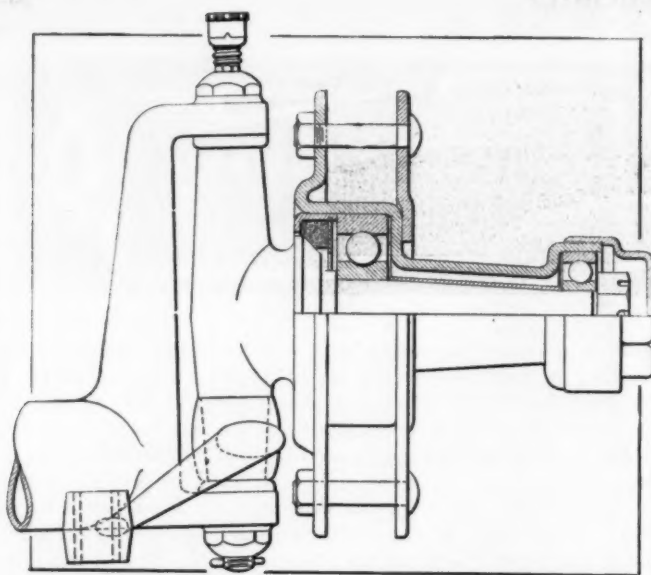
Depicting annular type ball bearings in a hub made of drawn steel, with a drop forged knuckle
